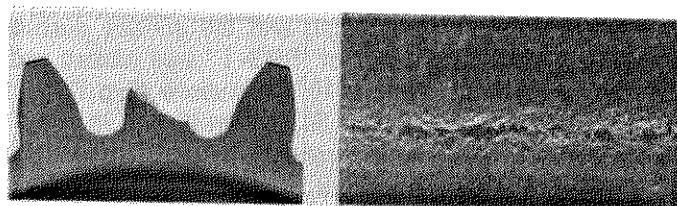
The tooth broken at pitch point and the tooth surface damaged by pitting after running in Exp. [20]
